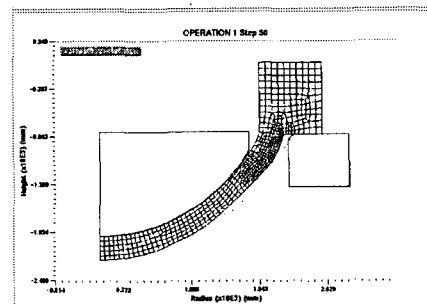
Forging concept of JSW<sup>(4)</sup>
